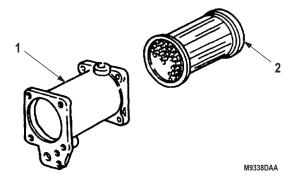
Engine Oil Cooler Cleaning and Inspection.
